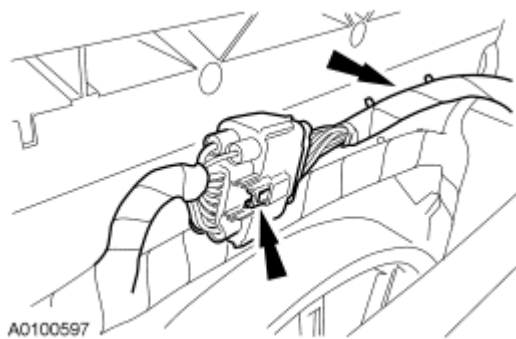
Locating 10-Pin Electrical Connector & Wiring Retainer
